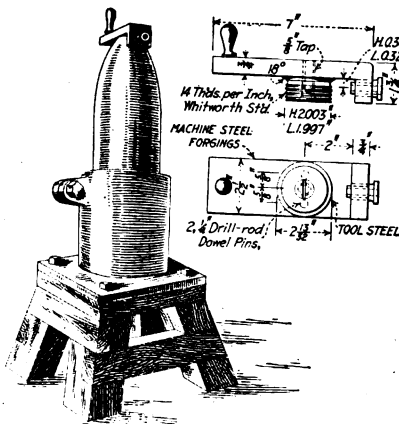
OPERATION 8: DRILL AND TAP FOR GRUB SCREW
